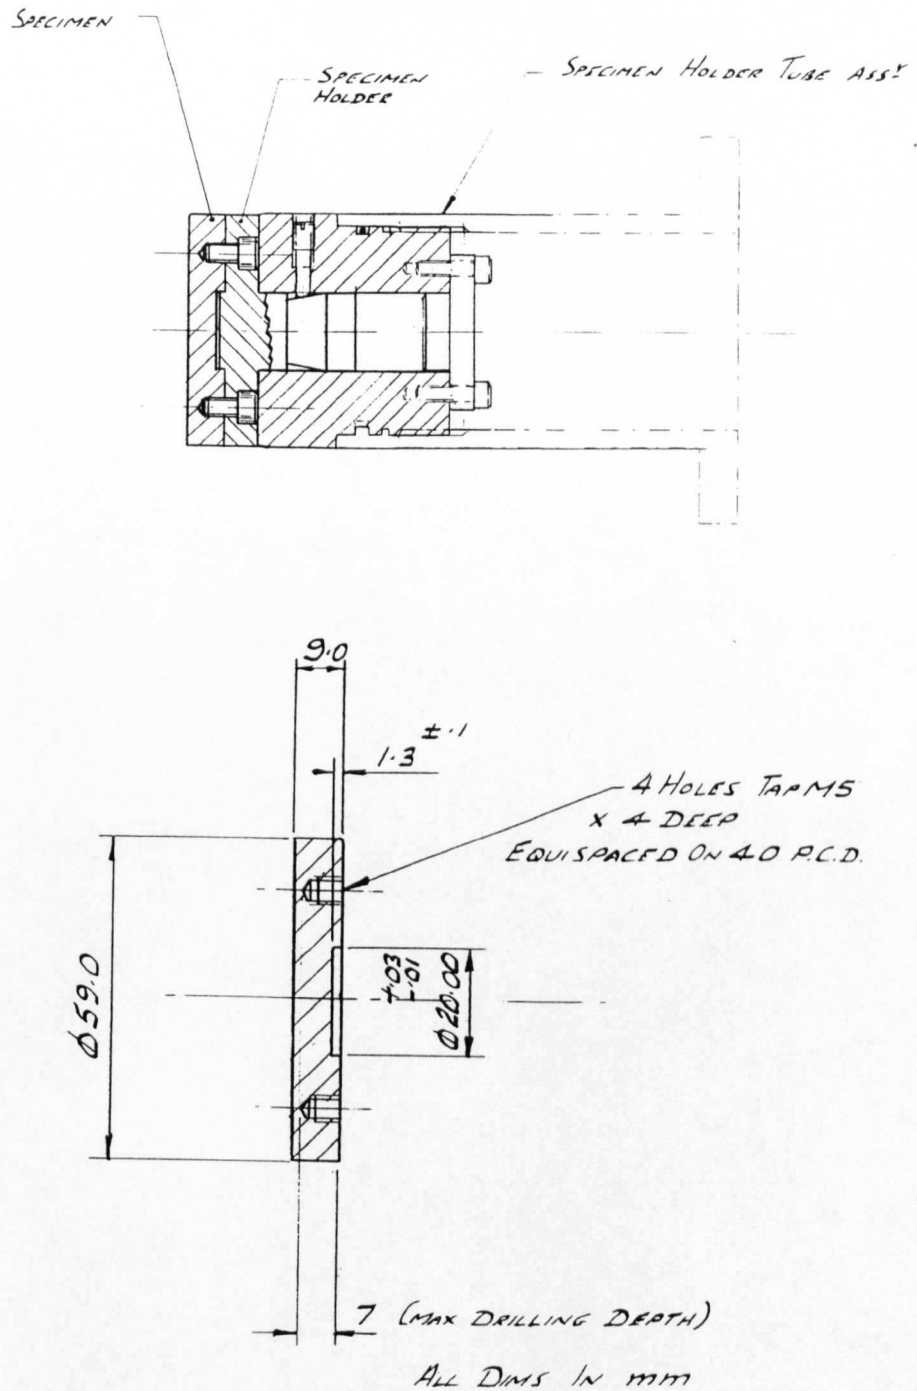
Specimen and specimen holder assembly of erosion tests.
